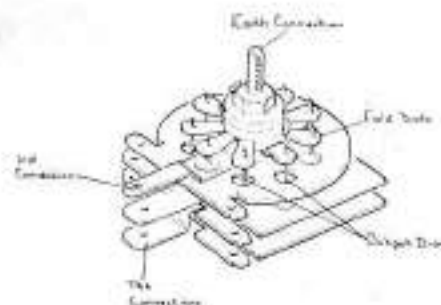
View of diode pack. Renew complete assembly if defective diode is found.
